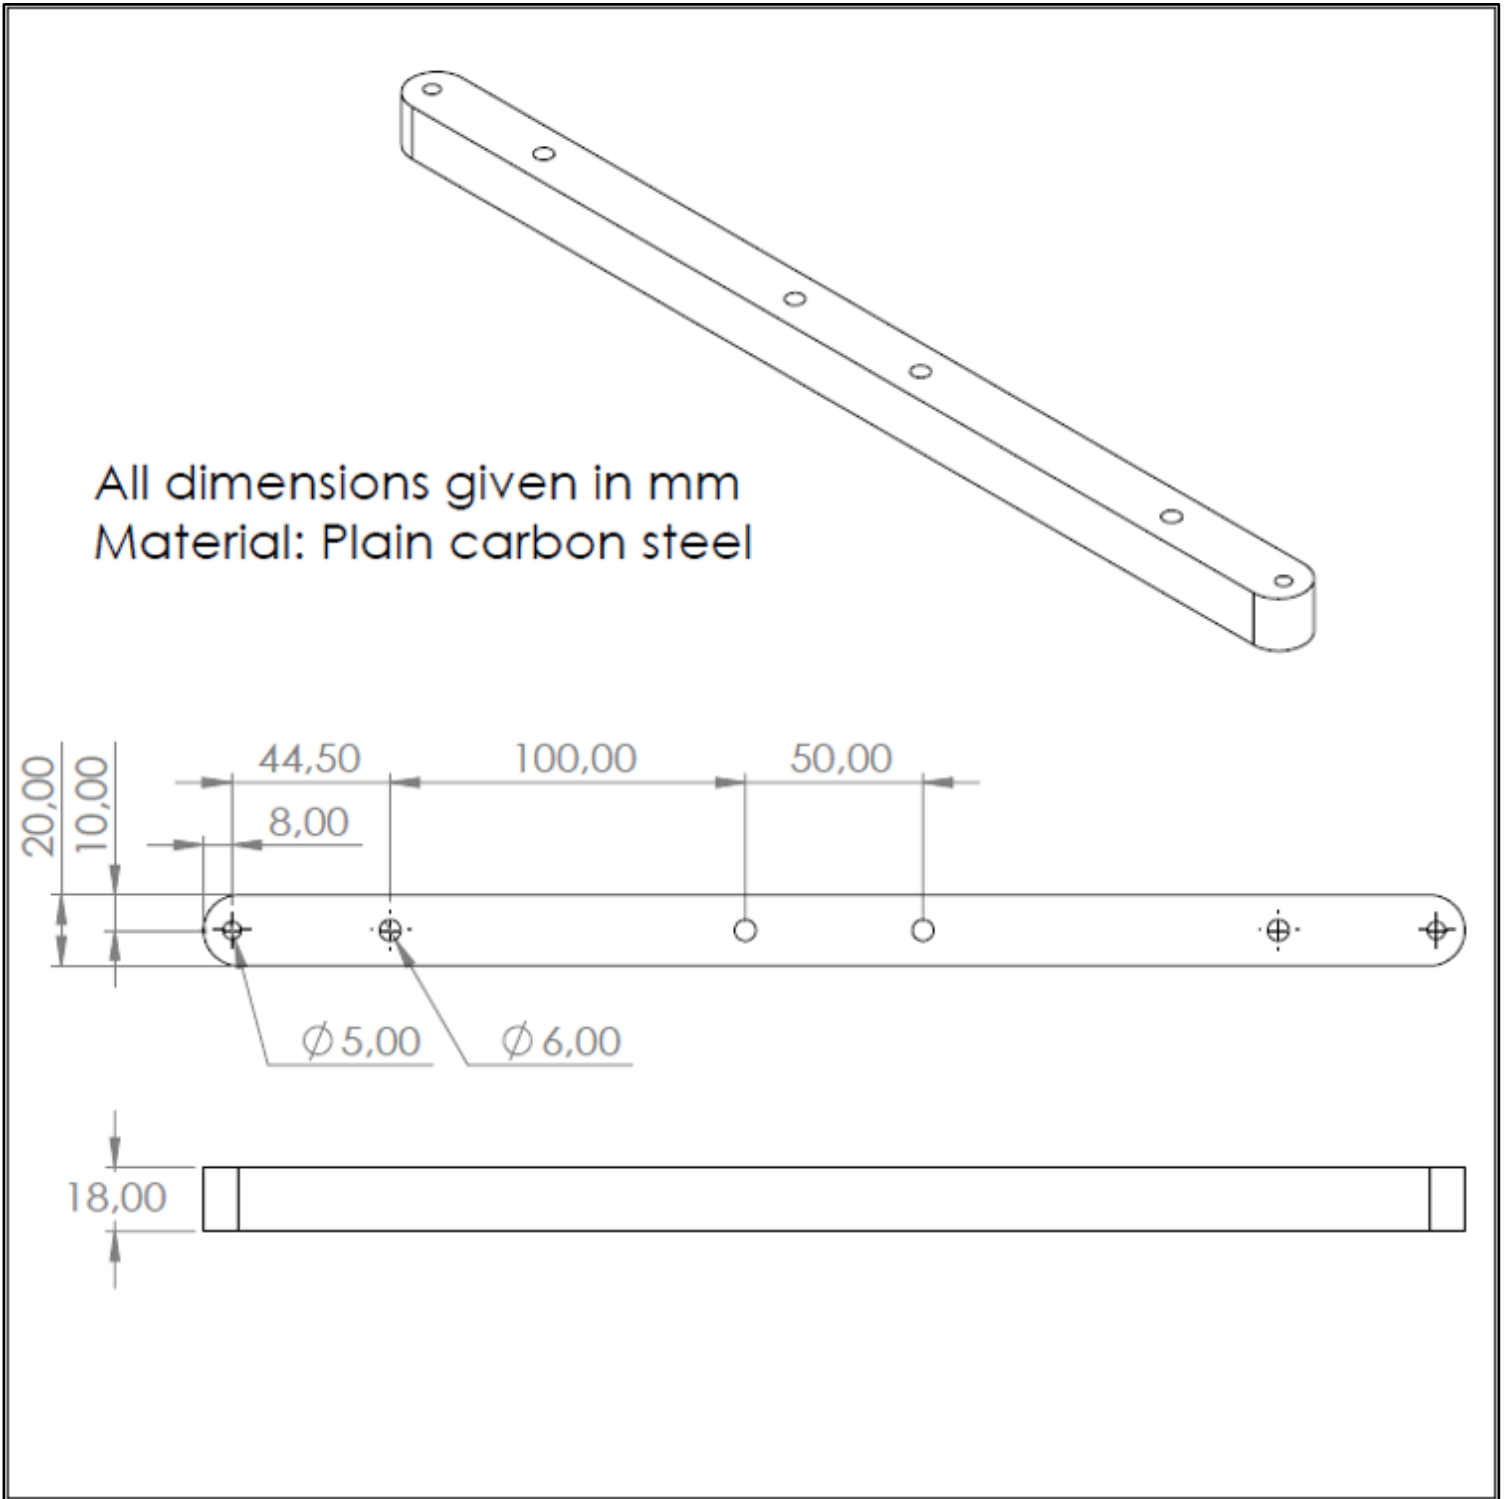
Adhesion alignment jig pressure plate detail drawing.
